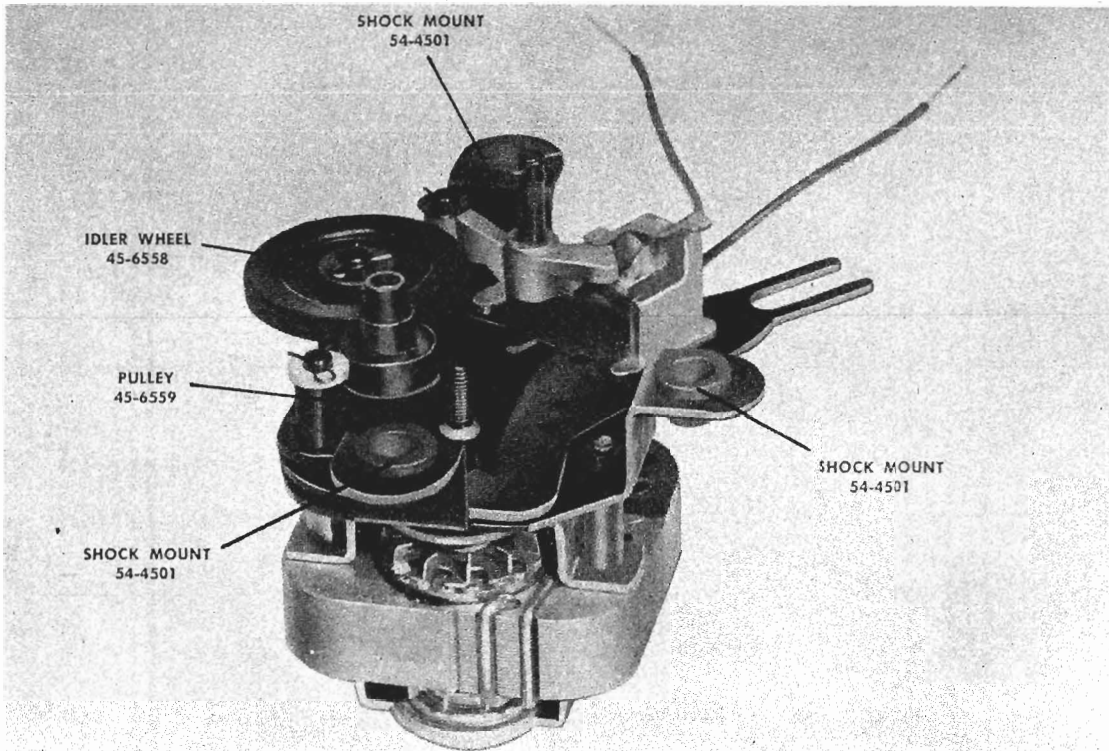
MOTOR ASSEMBLY—PART NO. 35-1433
